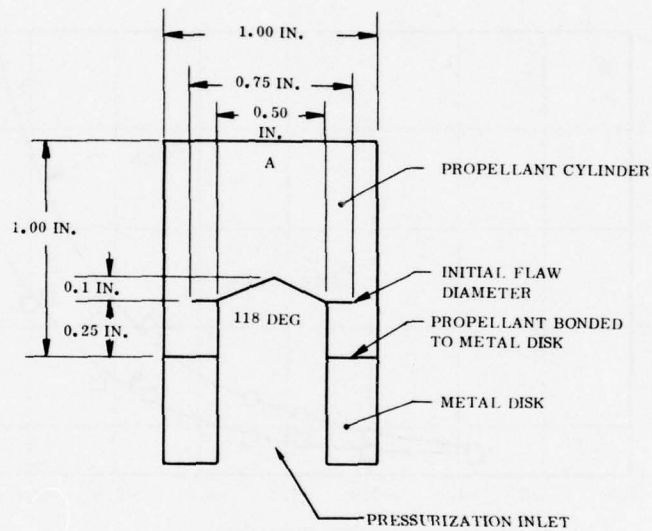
Cylindrical Cohesive Fracture Energy Specimen
